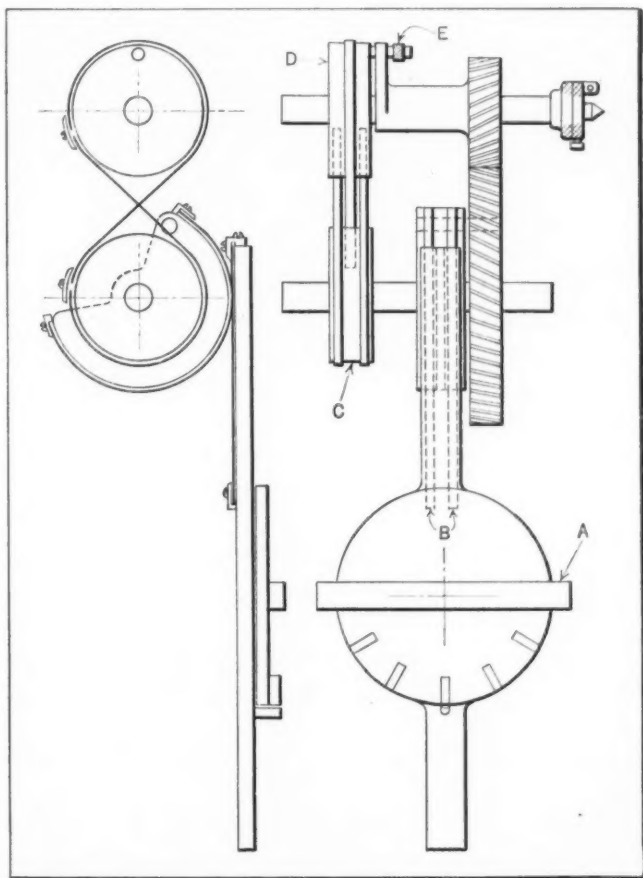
Diagrammatical View, Showing the General Arrangement of the Important Parts of the Lead Checking Machine
